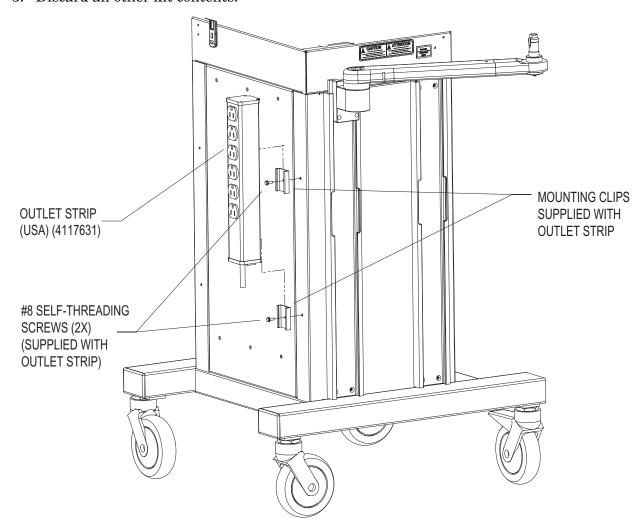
Power Outlet Strip Assembly Installation on Fabius Tiro
